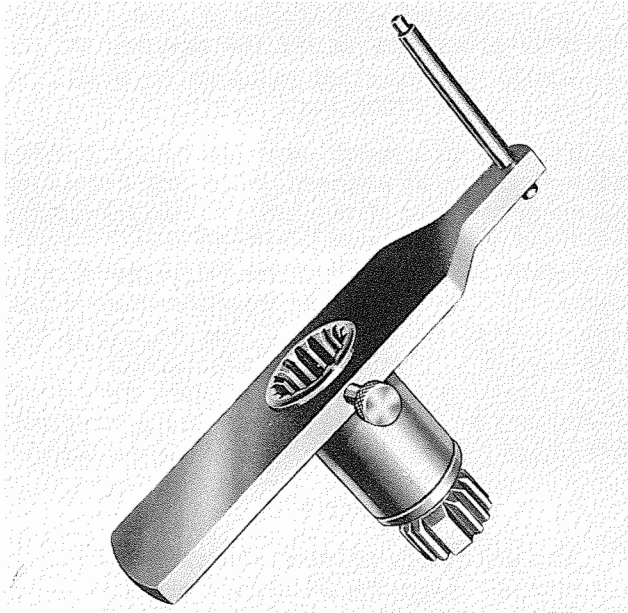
Fuel Injection Pump and Pump Drive Gear Spline Aligning Fixture
